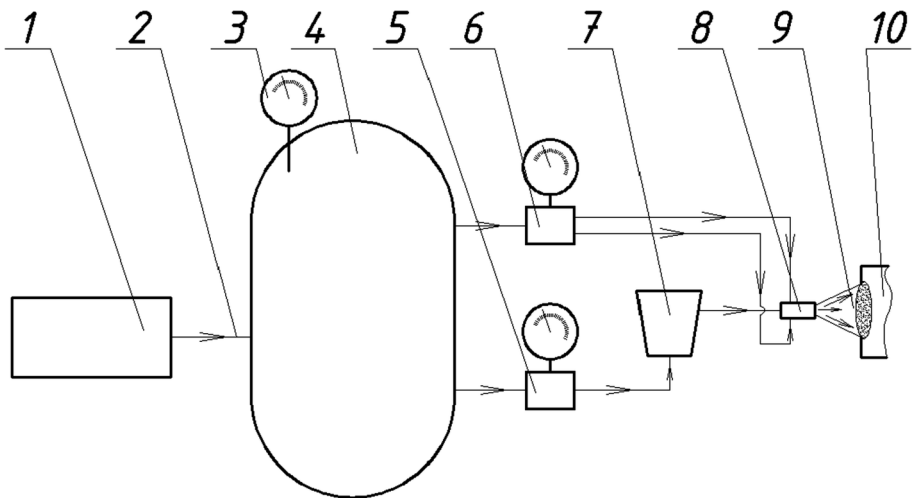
A scheme of abrasive jet machining of parts using assembled nozzle of a new design: 1 - compressor; 2 - hose; 3 - pressure gauge; 4 - receiver; 5 - regulator of air pressure of the main flow; 6 - air pressure regulator of the additional flow; 7 - a mixer of abrasive and air; 8 - assembled nozzle of new design; 9 - a mixture of air flow with abrasive, so called working flow; 10 - the surface of the workpiece.
